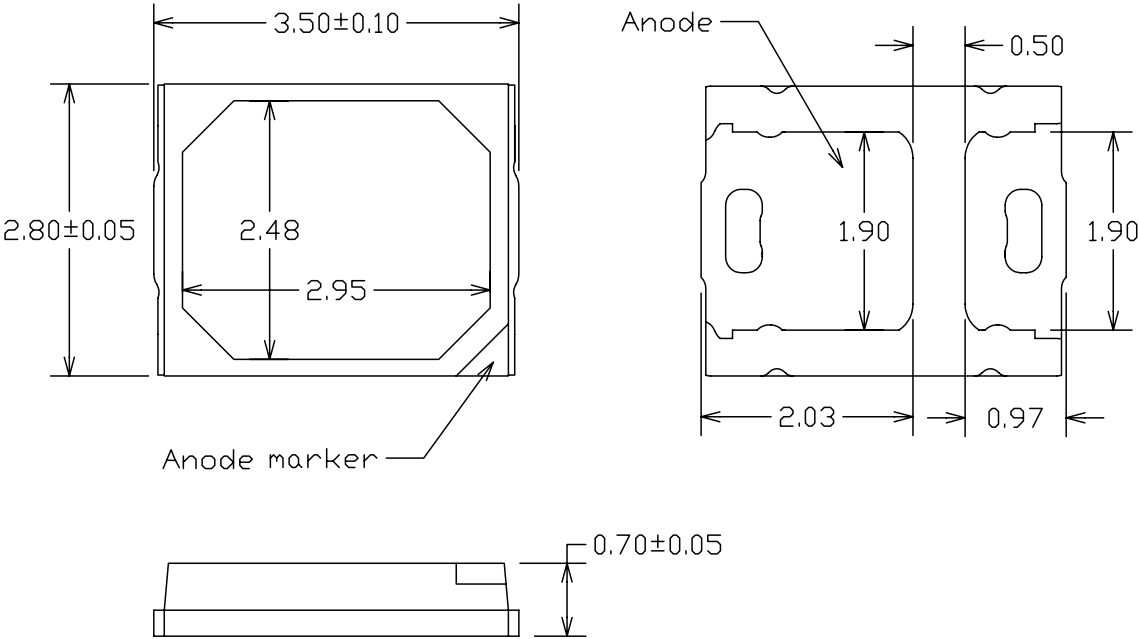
Mechanical dimensions for LUXEON 2835 Color Line.
